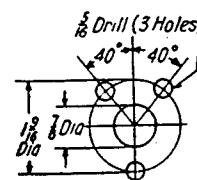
DRILLING PLAN FOR TYPE W INSTRUMENT AND CONTROL SWITCHES
